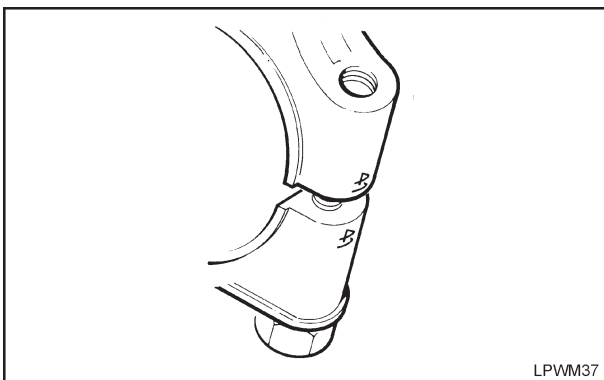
Connecting Rod and Cap Identification Marks
